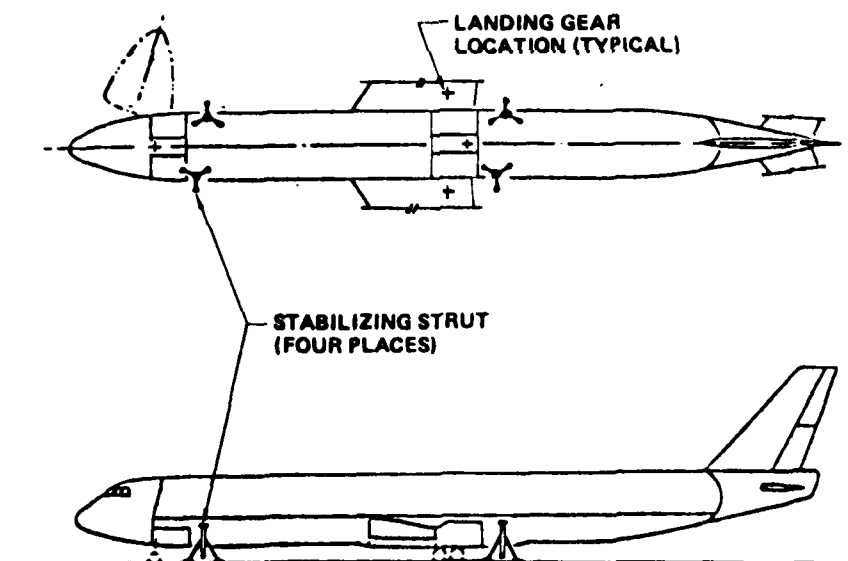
Stabilizing Struts - Locations on Airplane
